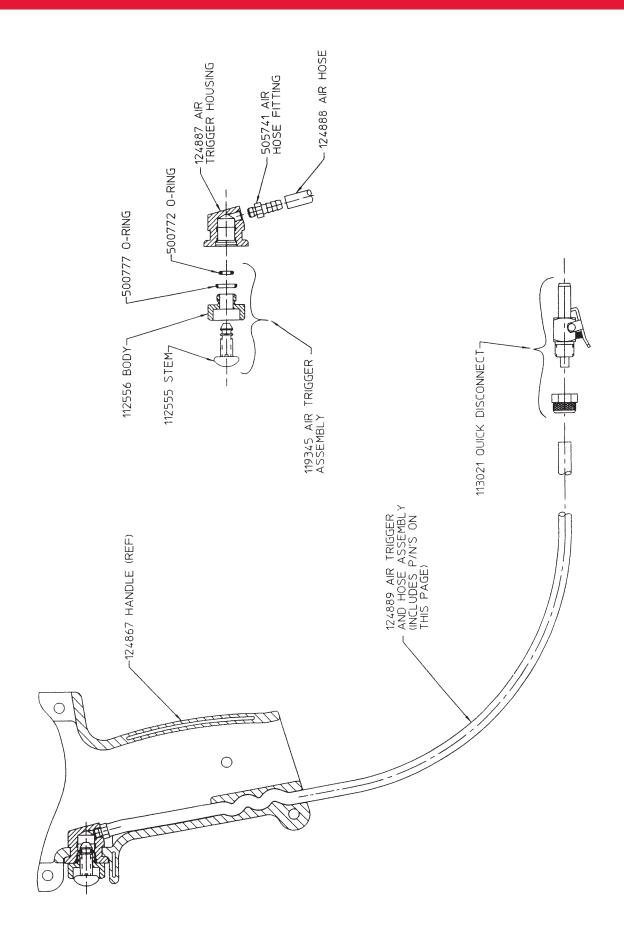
A2480 - Air Trigger and Hose Asssembly
